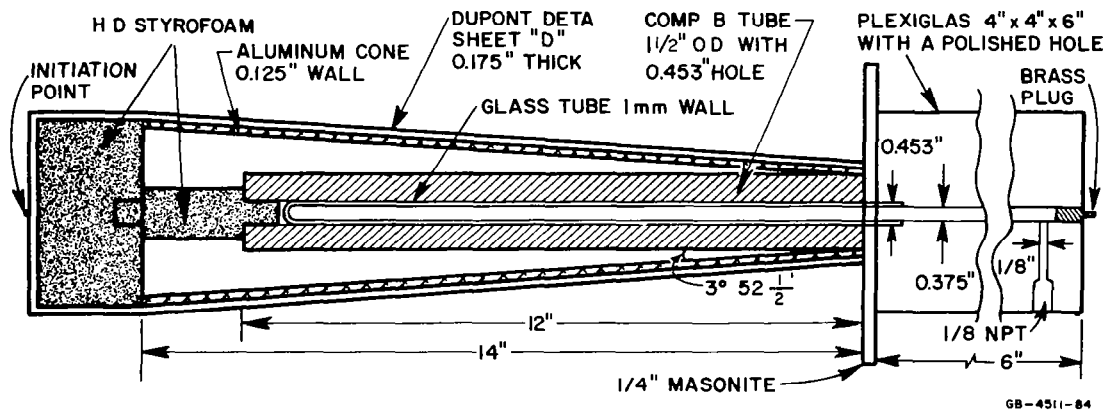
COAXIAL CONICAL HIGH-SPEED DRIVER
